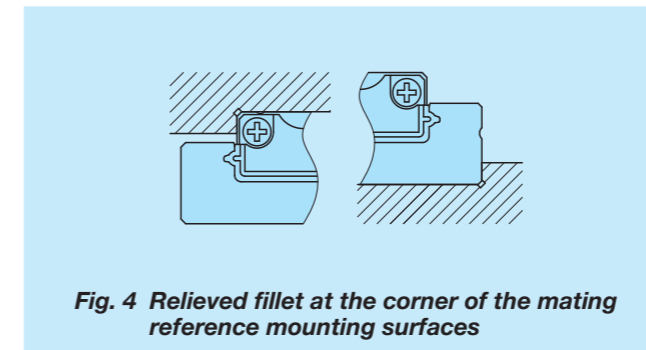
Relieved fillet at the corner of the mating reference mounting surfaces
